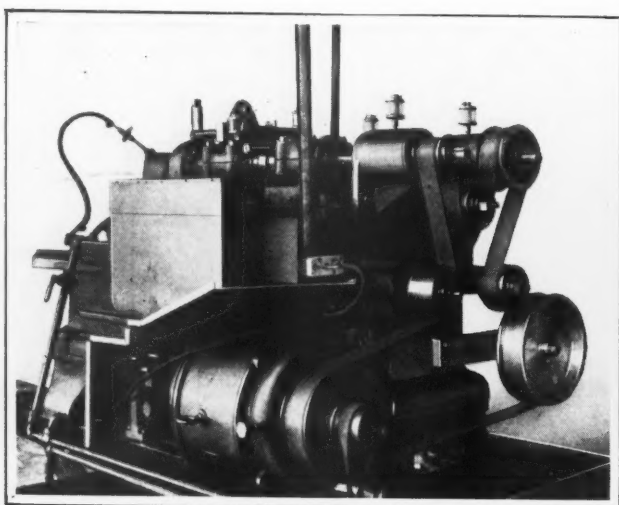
Driving Arrangement of the Diamond-boring Machine
